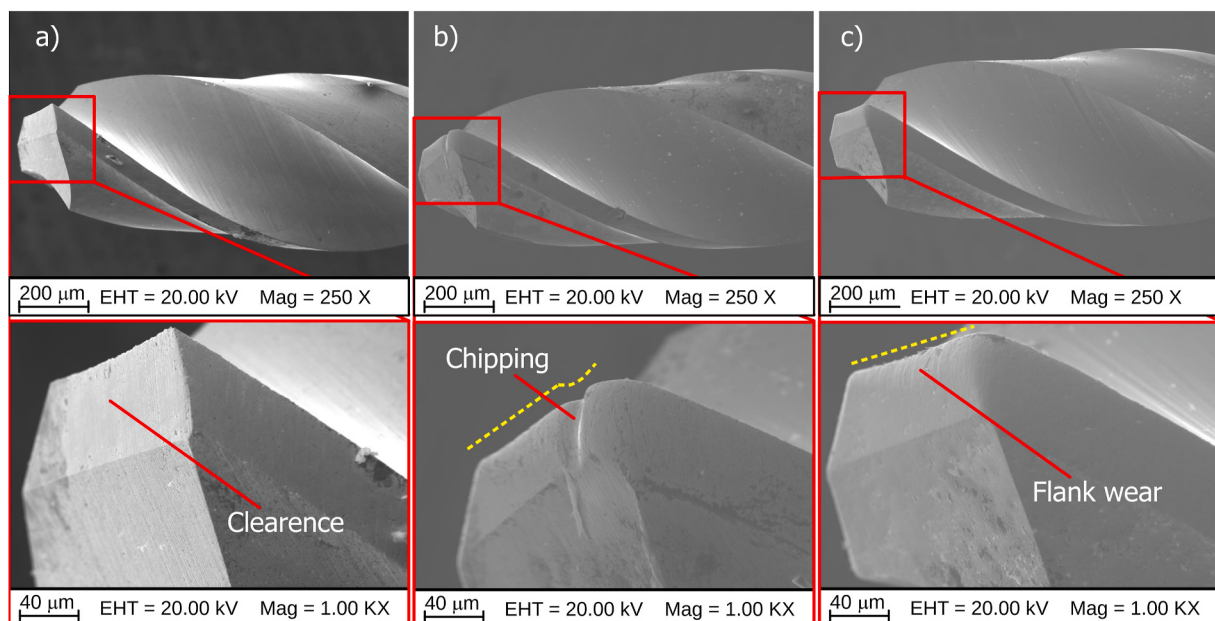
Scanning electron microscopic images of the flank surface of the micro-drills: a) original tool geometry before cutting, b) tool geometry after 1050 holes at feed of 8 μm , c) tool geometry after 1050 holes at feed of 24 μm .
